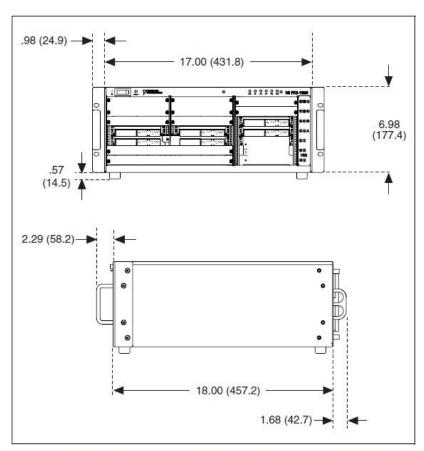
PXI-1056 Dimensions (Front and Side) in Inches (mm)
